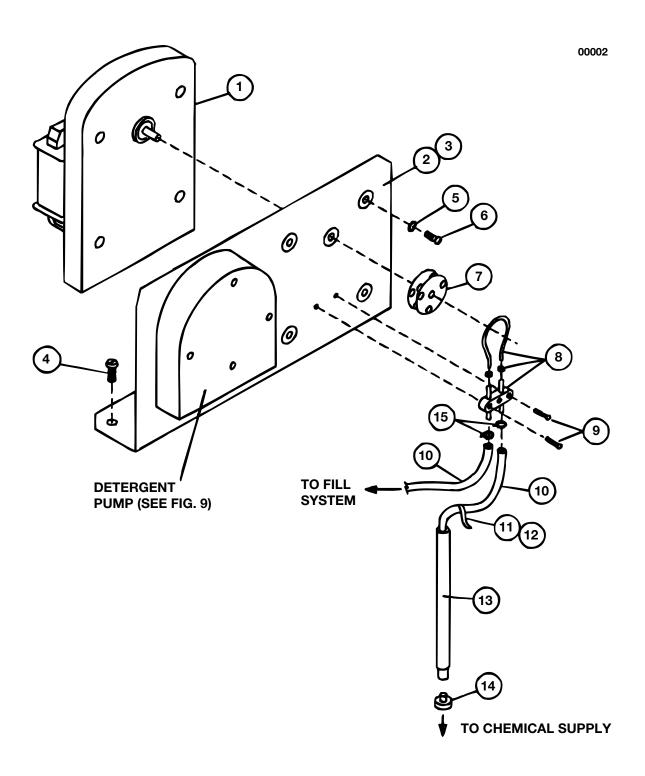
Sanitizer/Rinse Aid Pump Assembly
